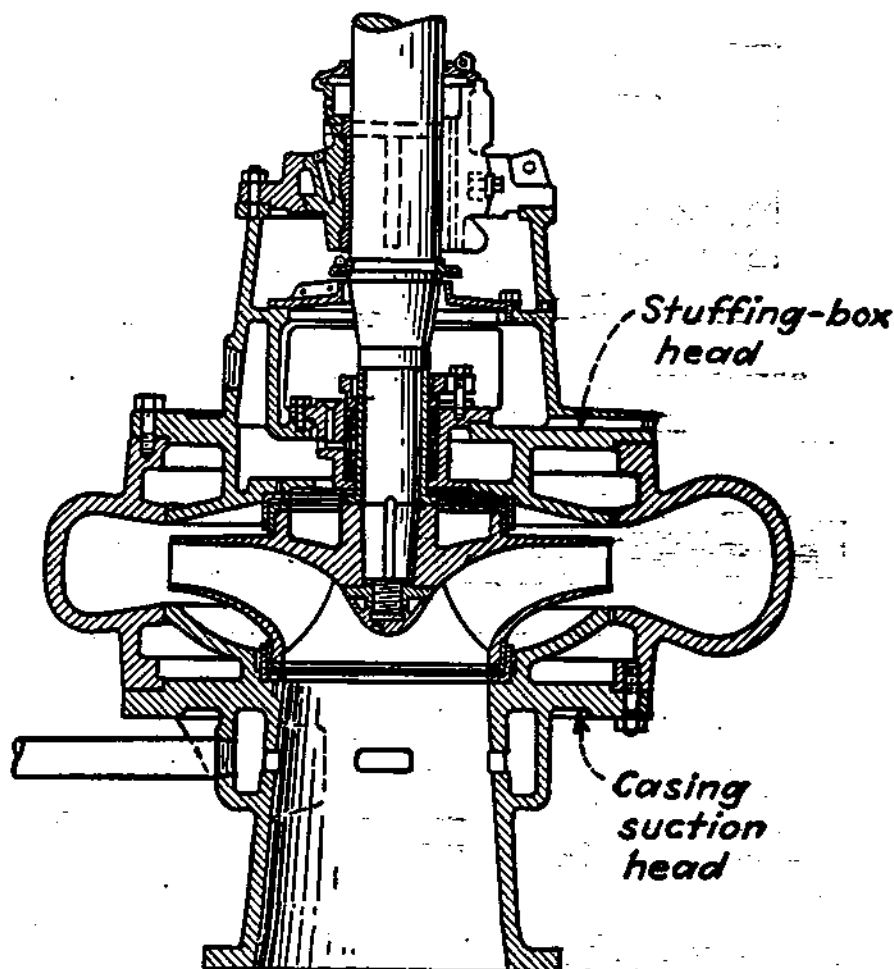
End-suction pump with removable suction and stuffing-box heads.
